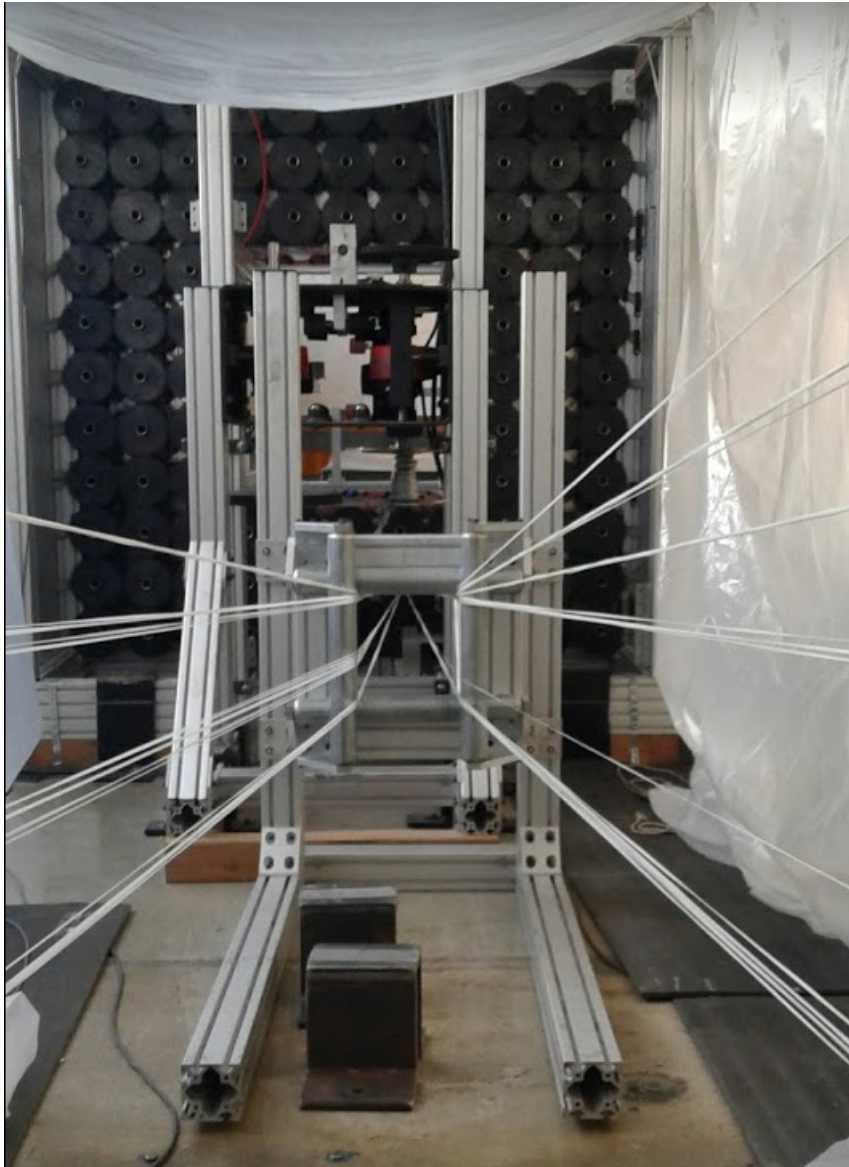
Back view of AN1 3-D Braiding Machine Showing Tows Passing through Center of Horn Gears
